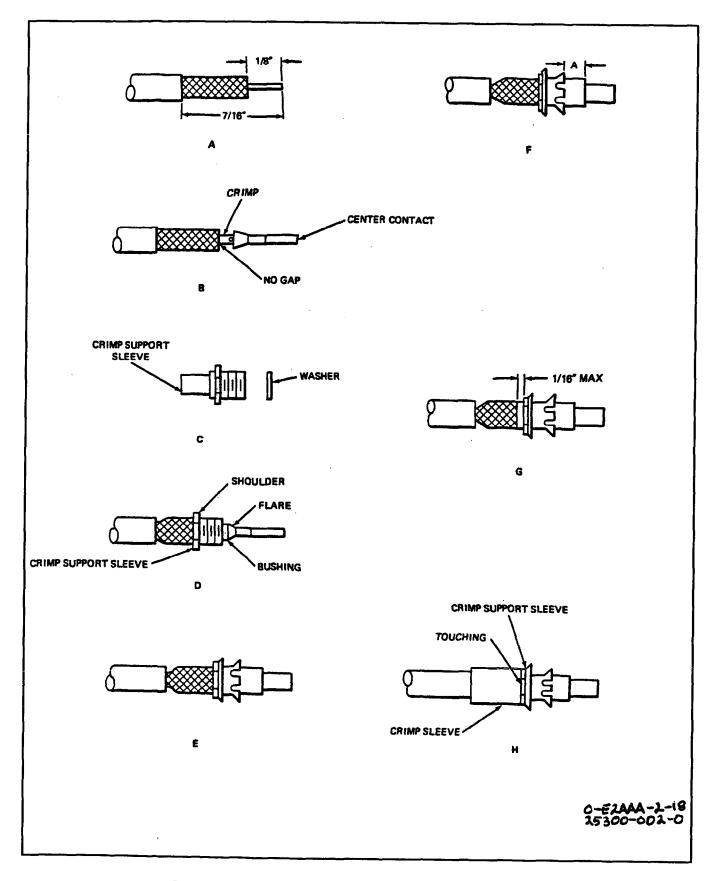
Coaxial Contact Repair of Connectors P3 and P4
